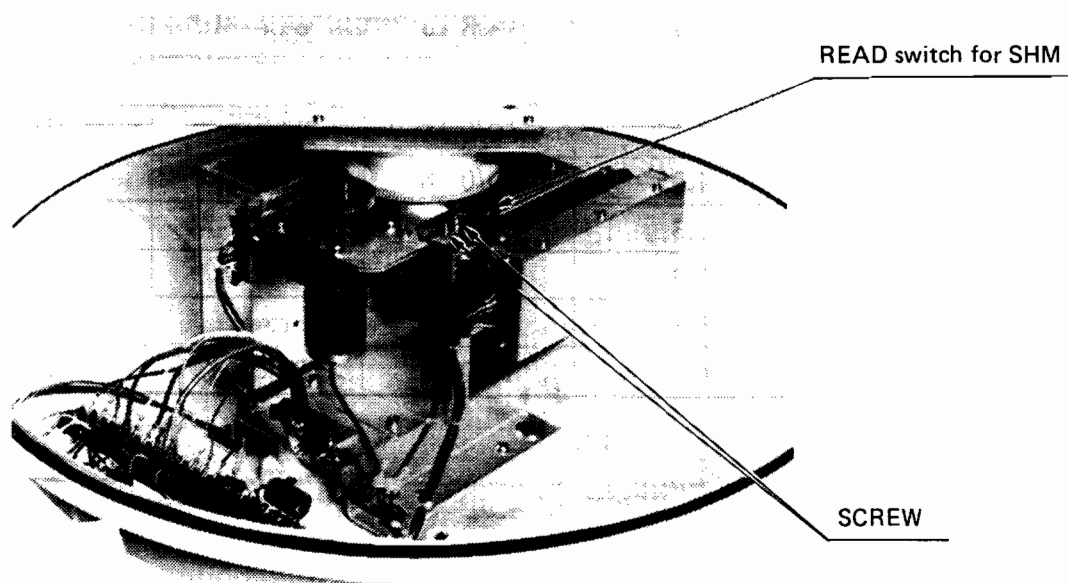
RELATIVE BEARING ALIGNMENT
